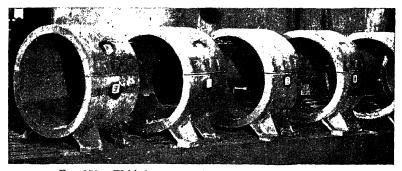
Welded generator frames. (Bethlehem Steel Co.)
